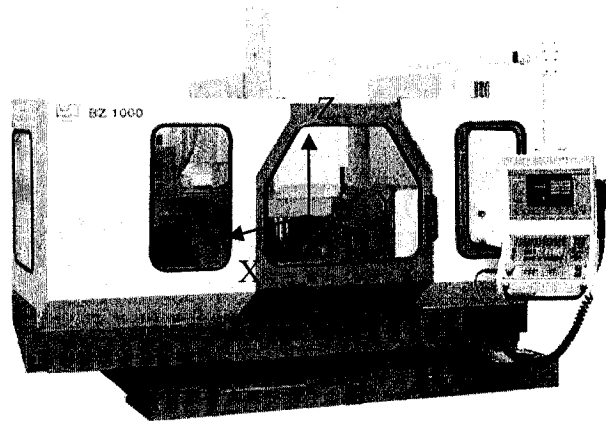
Diagram of a 3-axis CNC vertical milling machine.
